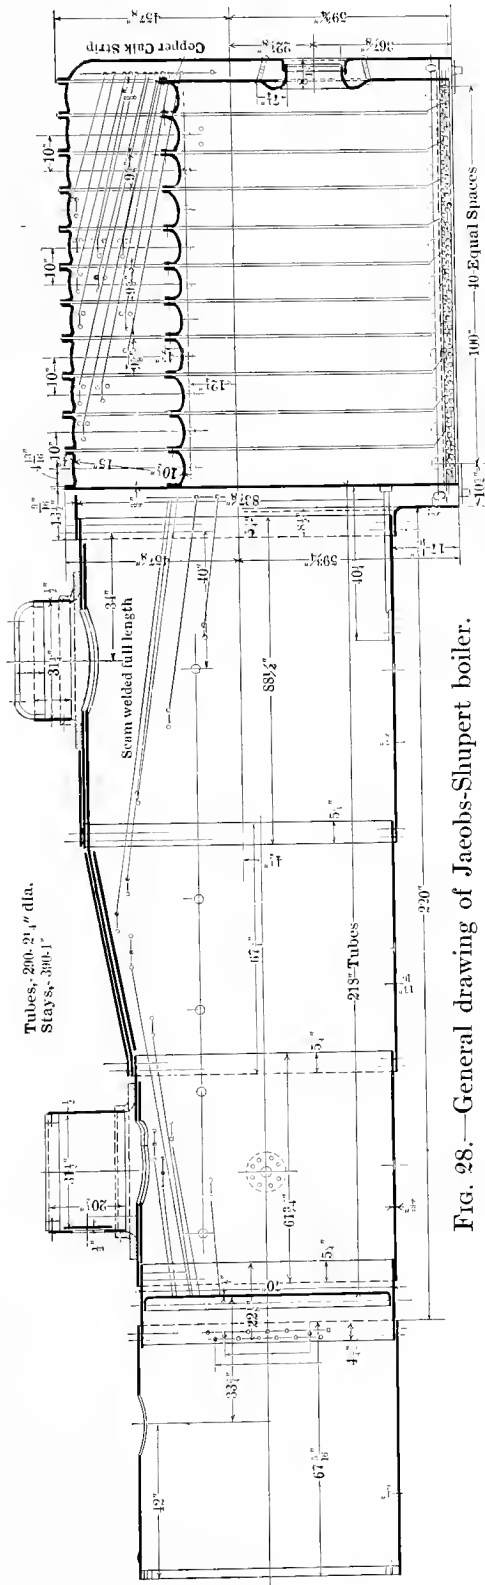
General drawing of Jacobs-Shupert boiler.
